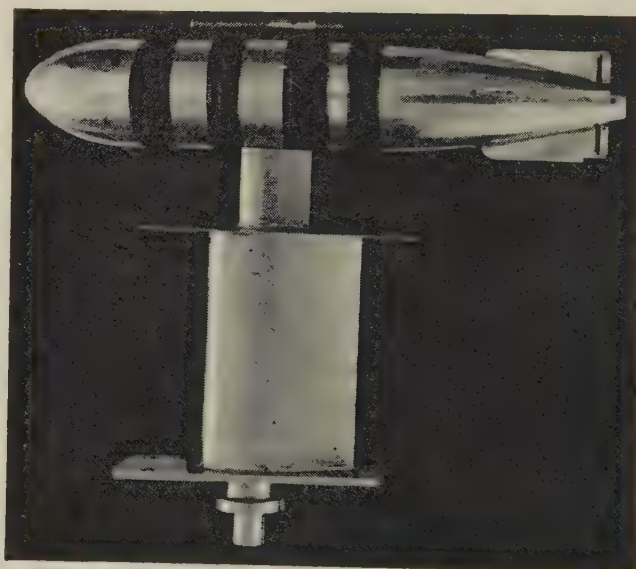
EXPLODED VIEW OF TYPICAL MODEL
